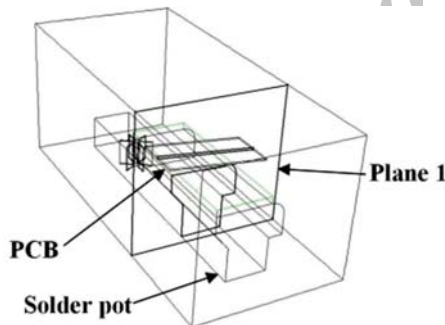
Cross-sectional view of wave soldering pot and PCB at Plane 1.
